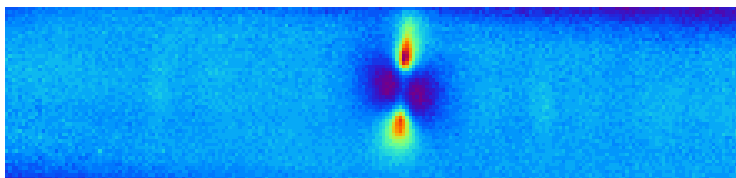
EddyTherm image of cracked 4-point bend specimen (specimen No. 1)
